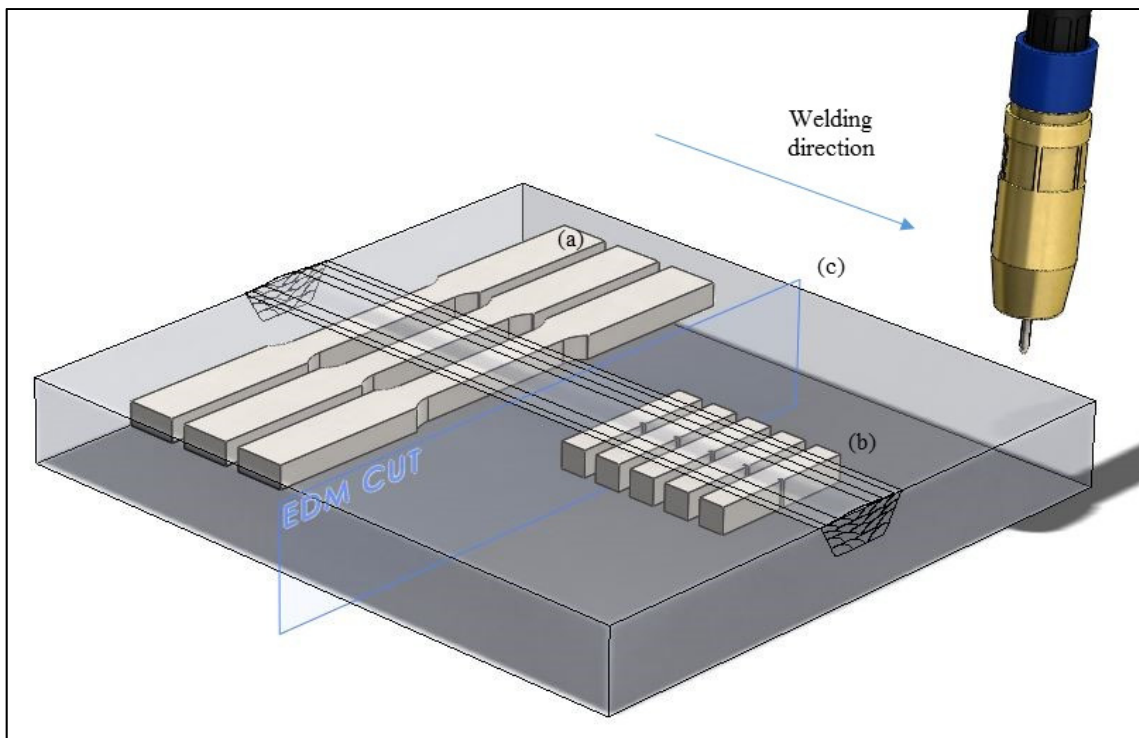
Schematic illustration of the specimen machined from the filled plates (a) Tensile specimen (b) Charpy specimen (c) EDM cut location for RS measurement
